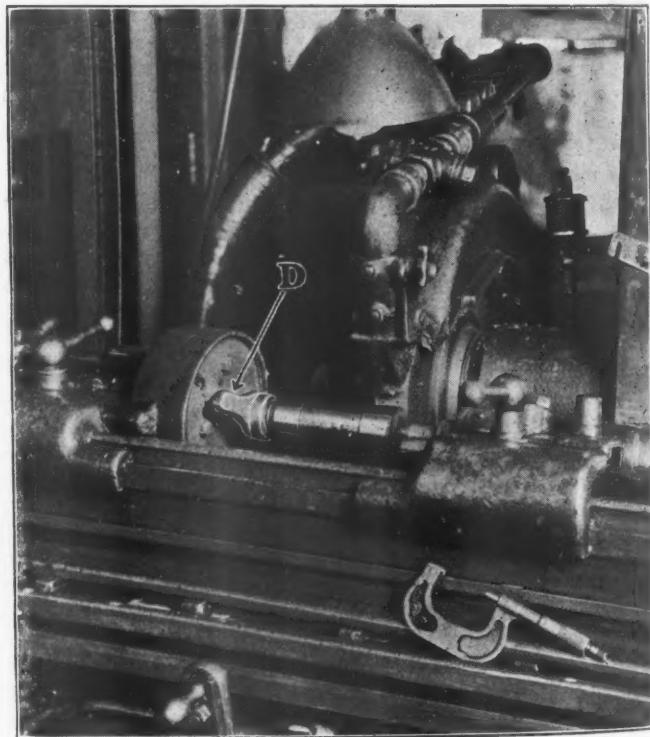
Close-up View Showing How Taper End Bearings Are Ground
